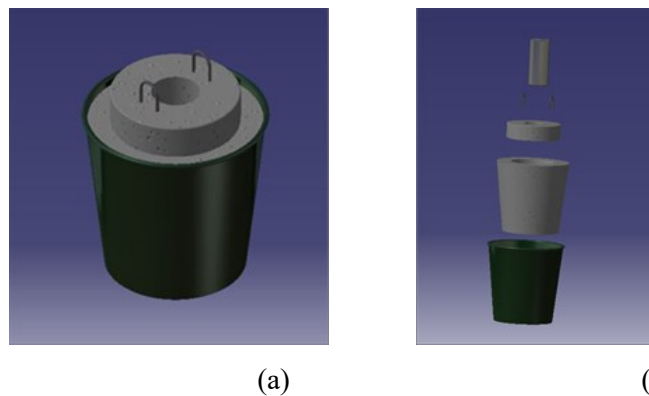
3D drawing of the mini furnace (a) isometric view (b) Exploded view.
